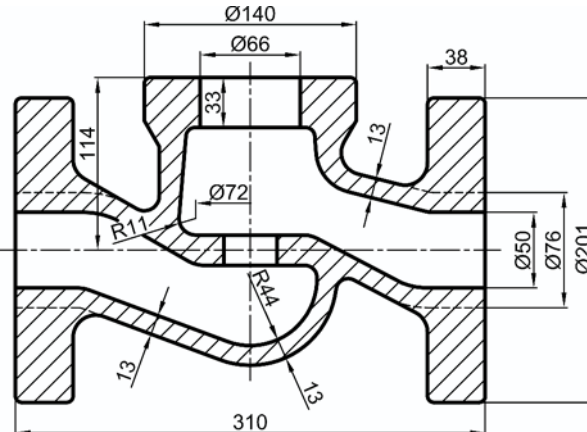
Layout and dimensions of the two-way globe valve housing DN50 PN160
